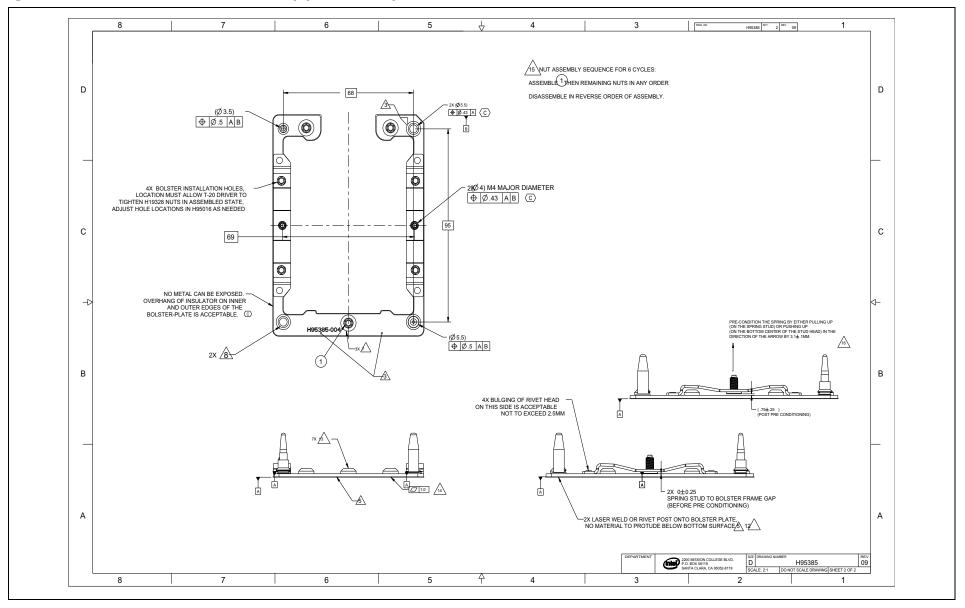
Square Bolster Plate Assembly (Sheet 1 of 2)
